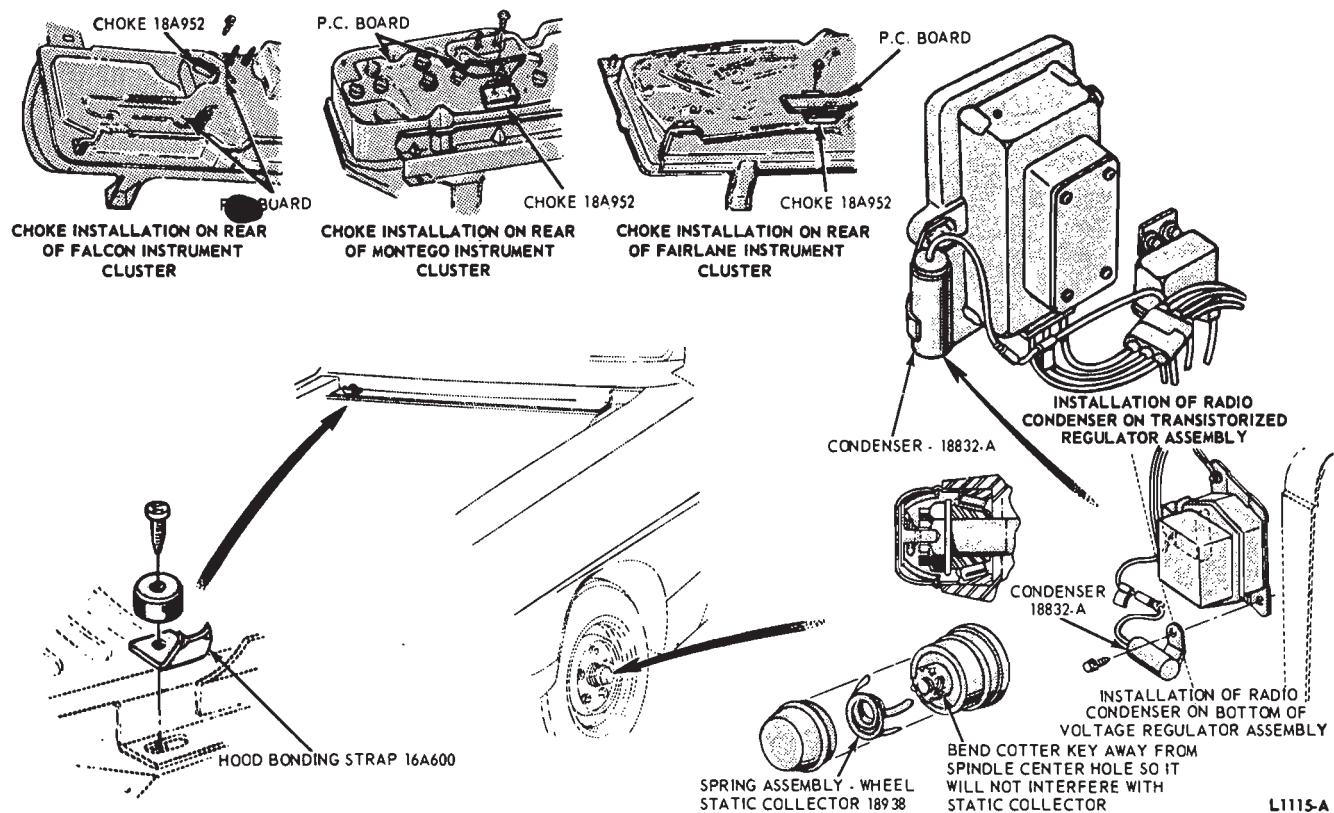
Falcon, Fairlane and Montego Radio Suppression Equipment Installation
